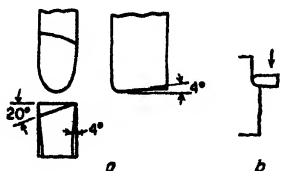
Tool No. 5. (a) Left-hand round-nosed roughing tool for steel; (b) Application of the tool. (The G. A. Gray Company)
